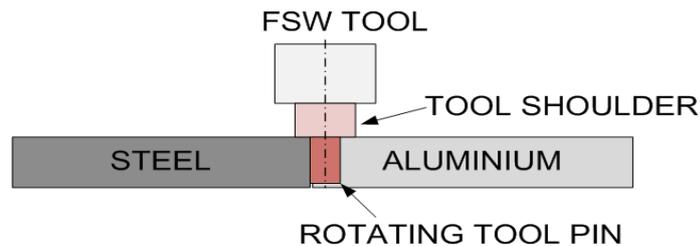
Schematic diagram showing the FSW tool and its placement during steel-aluminium joining by the friction stir welding
